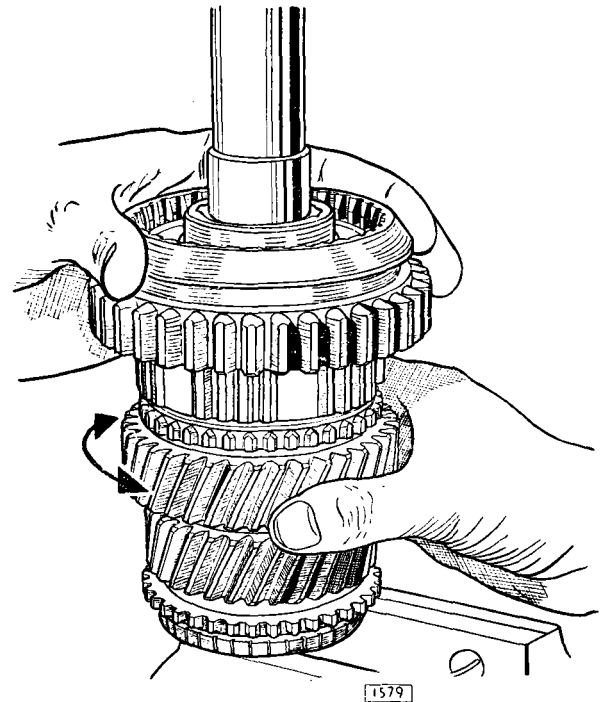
With 1st gear engaged and slight downward pressure on the synchro assembly the 2nd speed gear should be free to rotate.
